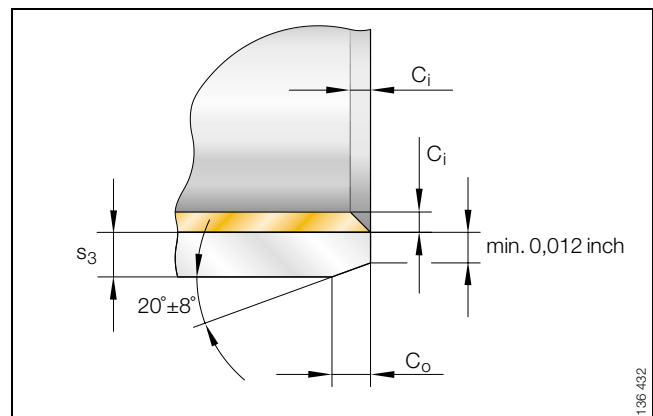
· Outer chamfer C_o and inner edge break C_i for inch sizes
